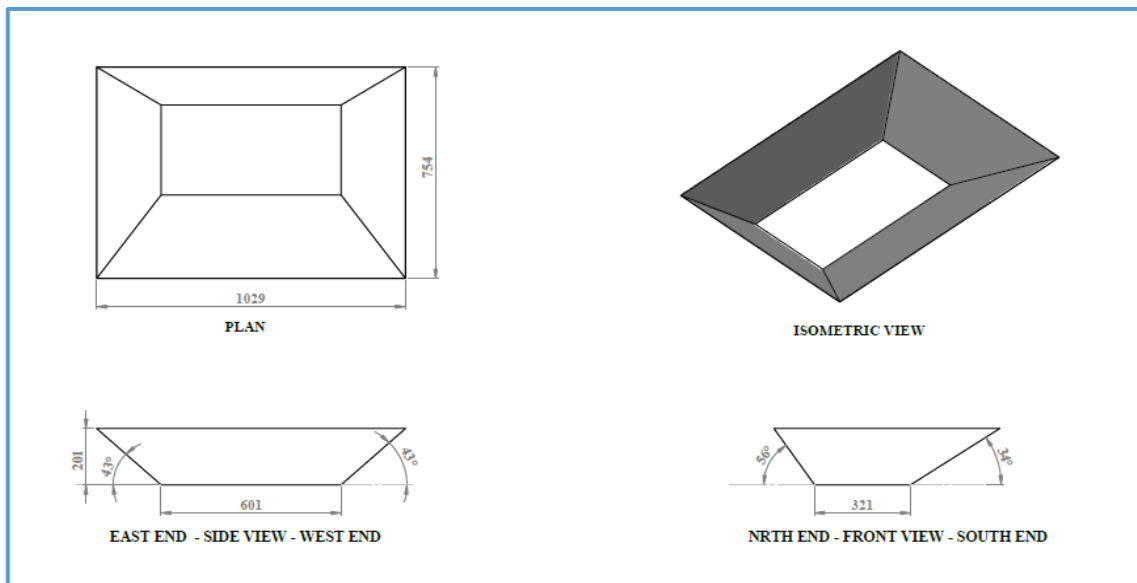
Views Showing the Internal Side - Wall Reflector Angles
